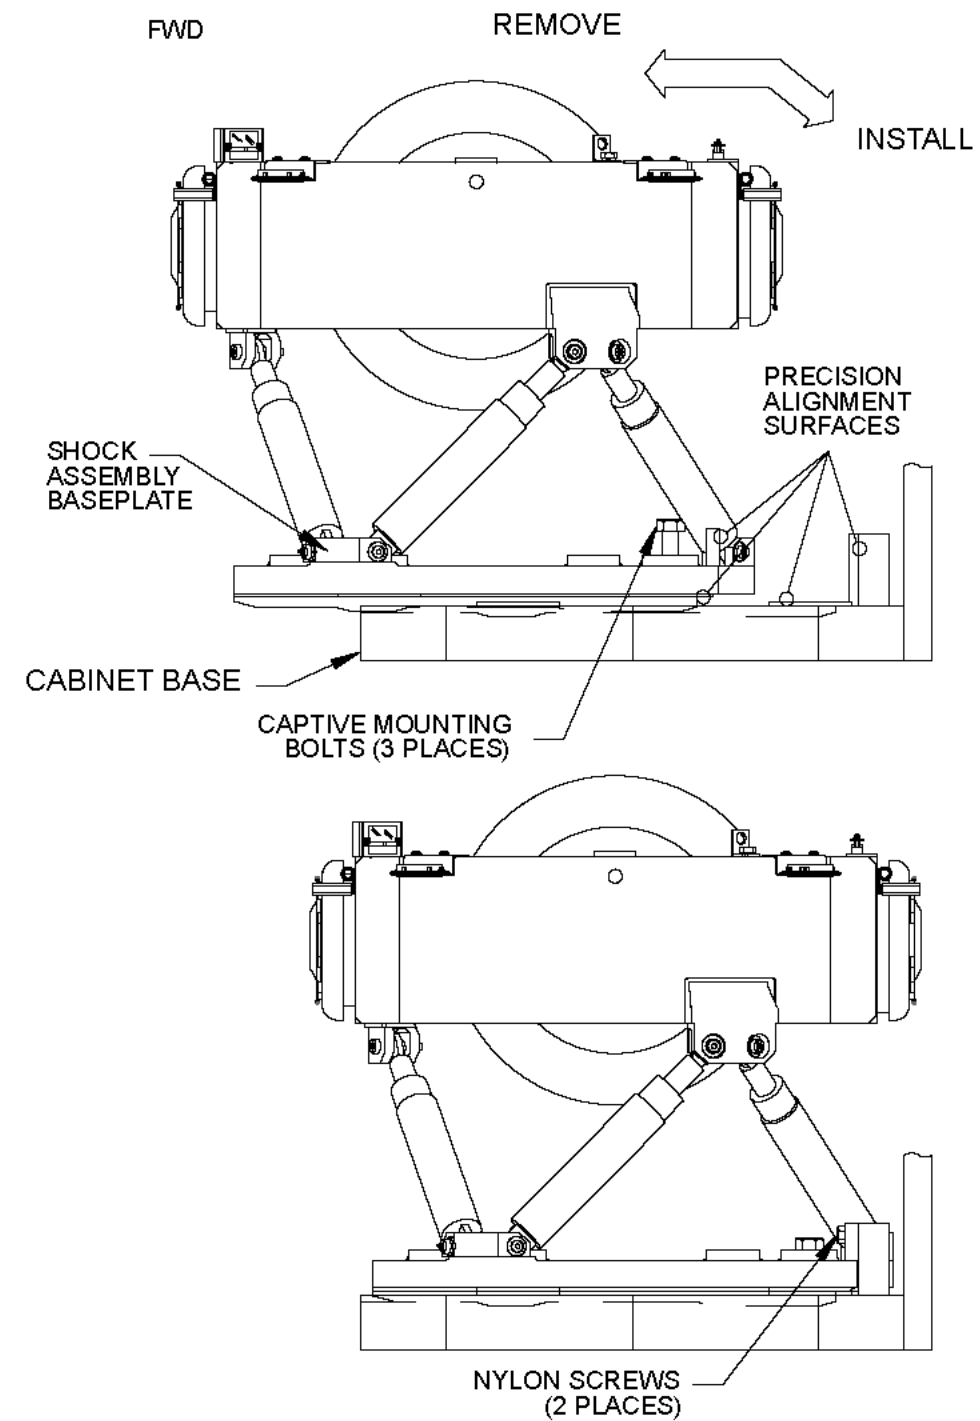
Removal of Inertial Measuring Unit from Measurement Cabinet Assembly
